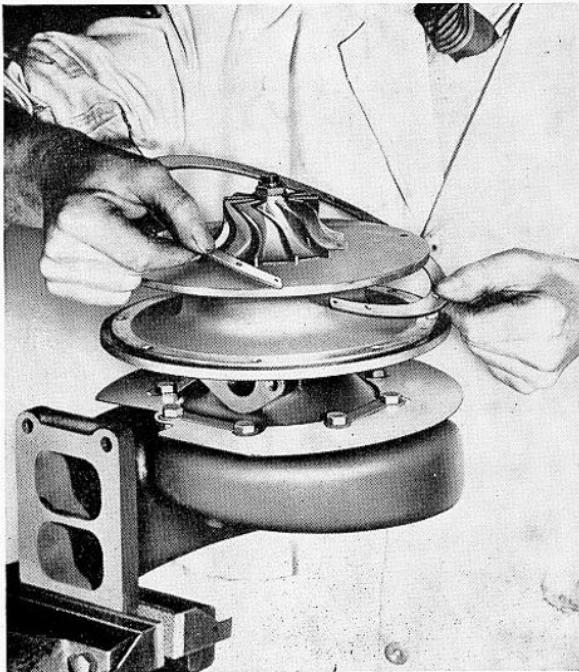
PLACING LOCK RING OVER COMPRESSOR HOUSING
